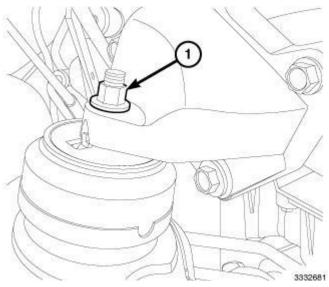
Right Engine Mount Retaining Nut Courtesy of CHRYSLER GROUP, LLC
